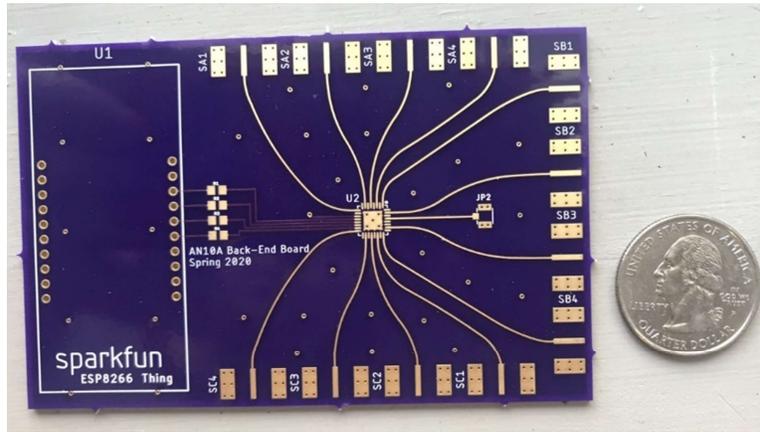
Fabricated back end PCB for controlling electrical beam steering
